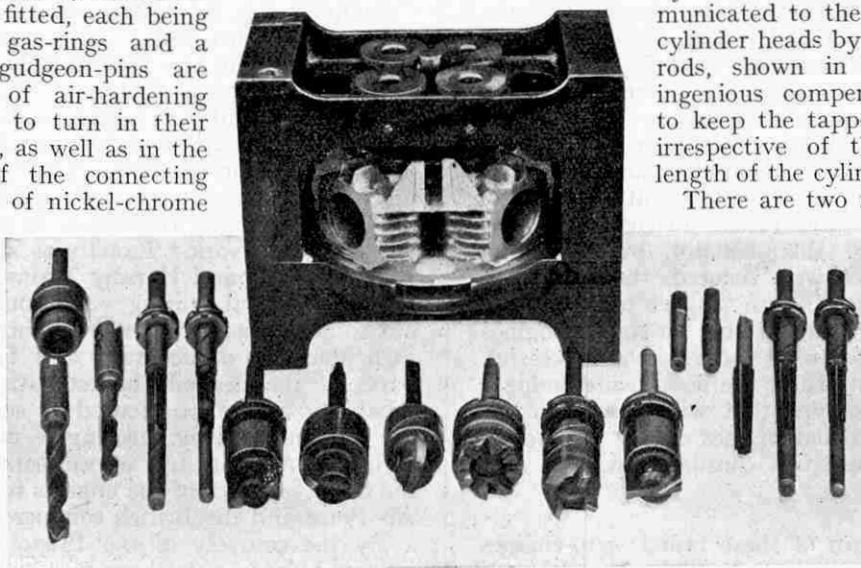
Fig. C. Jig for Drilling Valve-guide Holes in Cylinder Head
